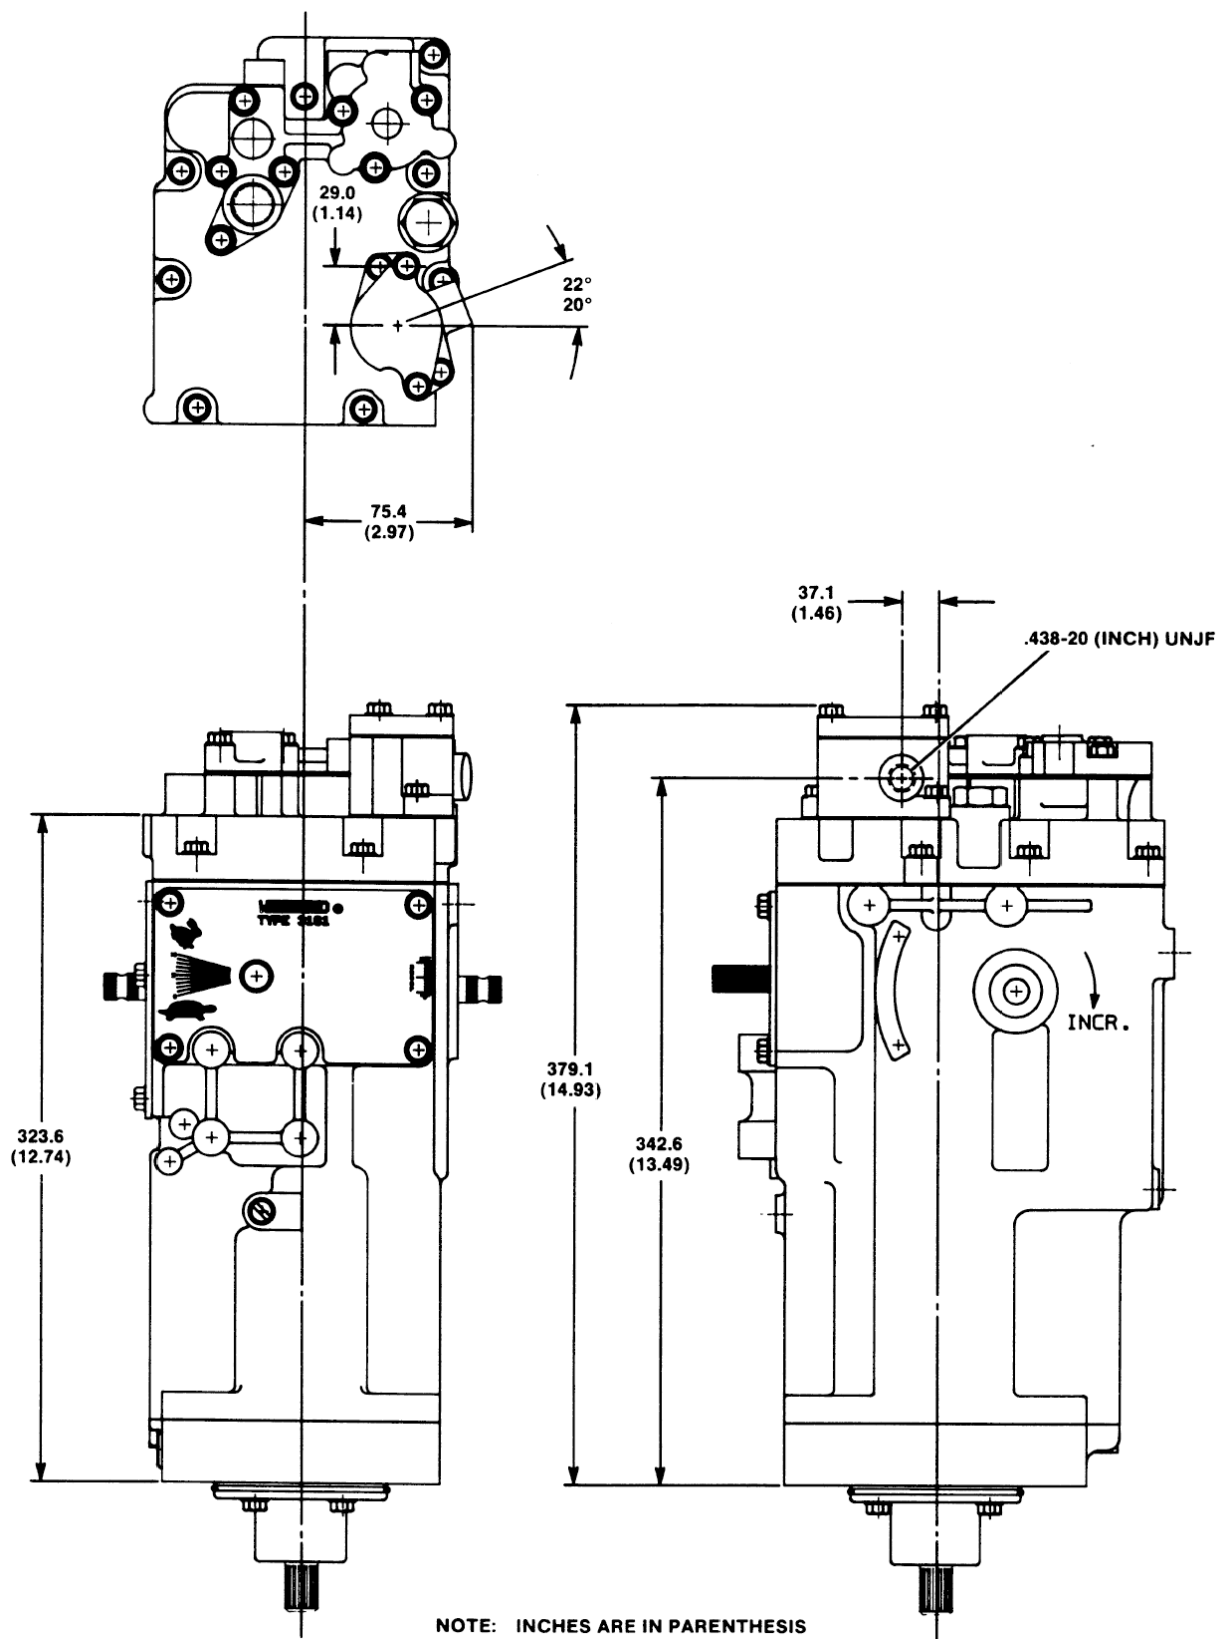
Outline Drawing of 3161 Governor with Pressure Shutdown Device
